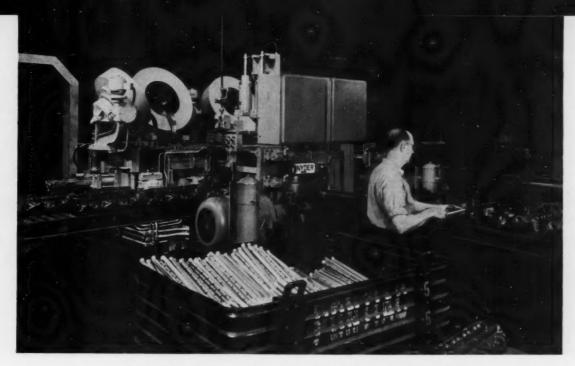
Rubber plugs are employed for sealing cylinder head to permit air-testing, and welch plugs are hopper fed into position on this assembly and testing machine.
